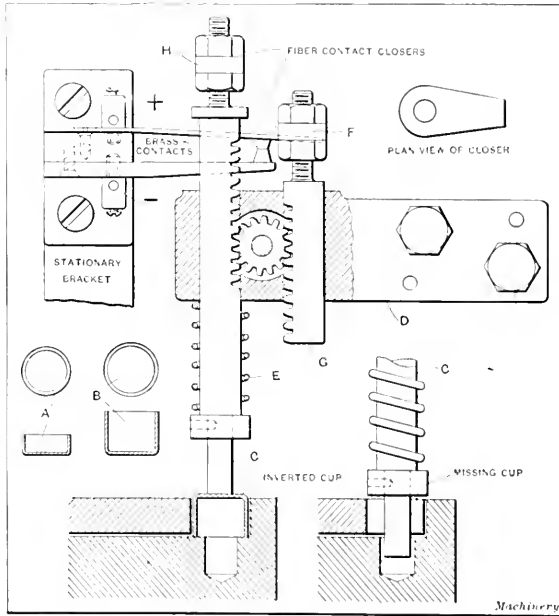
Trip used on Machine for assembling Shells *A* and *B
